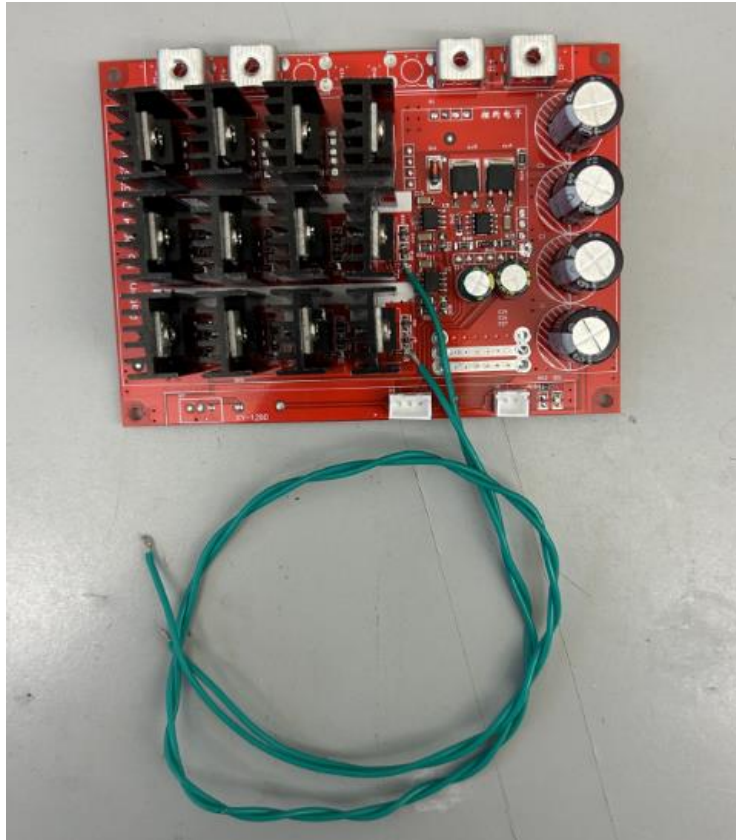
Soldered connections to the PWM inputs on Motor Driver
